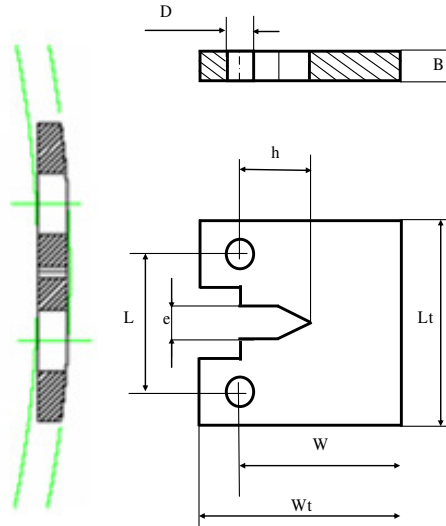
CT specimen (geometry and direction in the pipe wall thickness)
